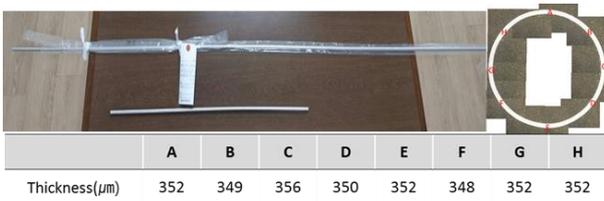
Photographs of FeCrAl tube fabricated by pilgering with a dimension of 9.5 mm OD x 0.35 mm t x 1.9 m L
